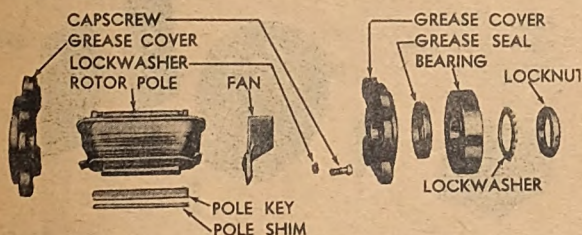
Rotor Pole, Fan, Pole Key and Shim
